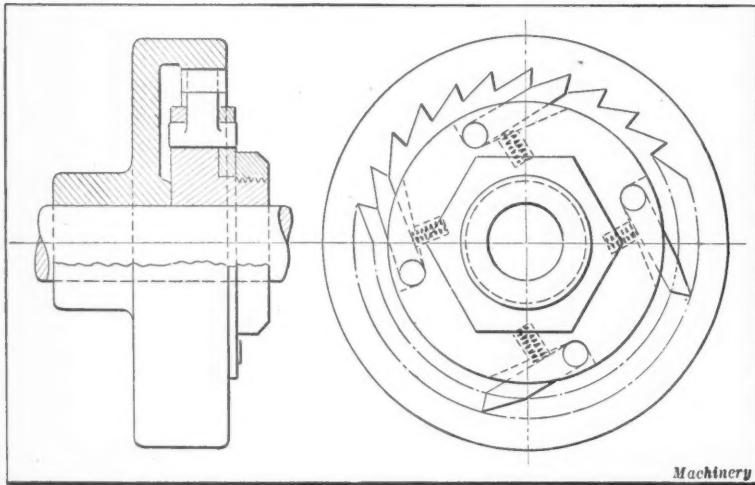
Internal-tooth Ratchet especially Suitable for High-speed Drives
